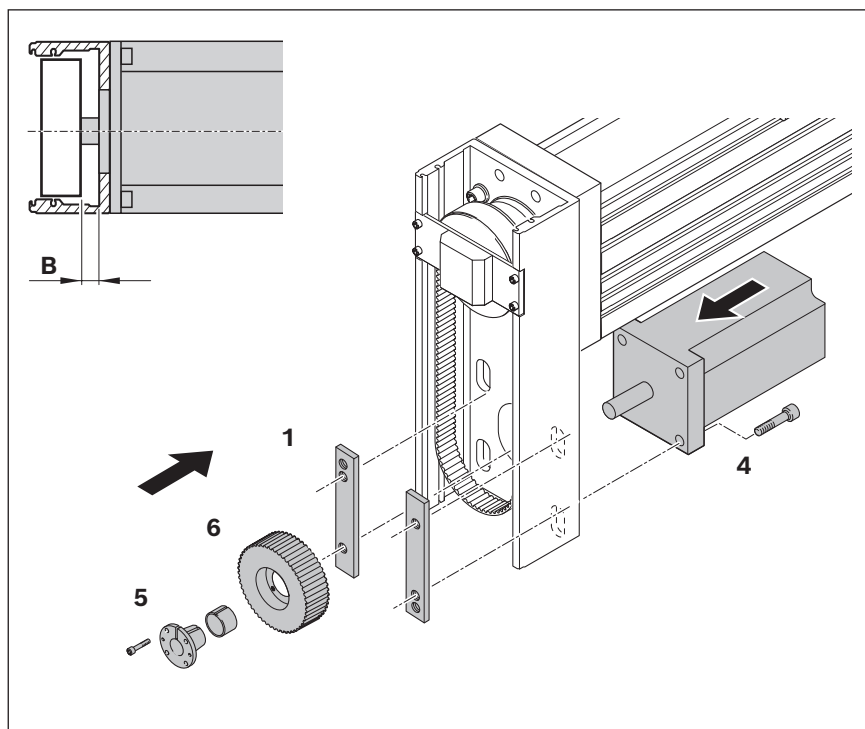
Mounting the motor and second belt pulley ($i = 1$)
